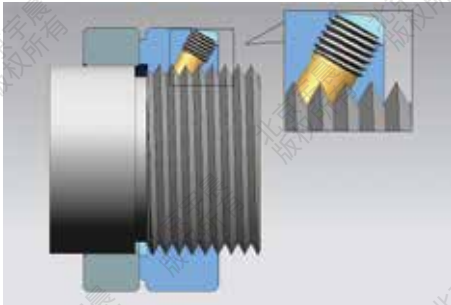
The locking pin and hex screw are at the same angle to the axis as the thread face
